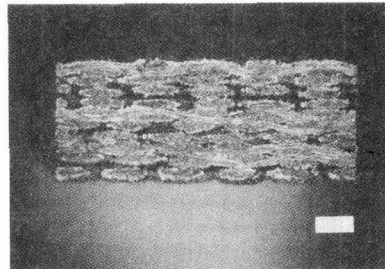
Fracture surface of tensile test specimen. (Bar: 1.0mm)
